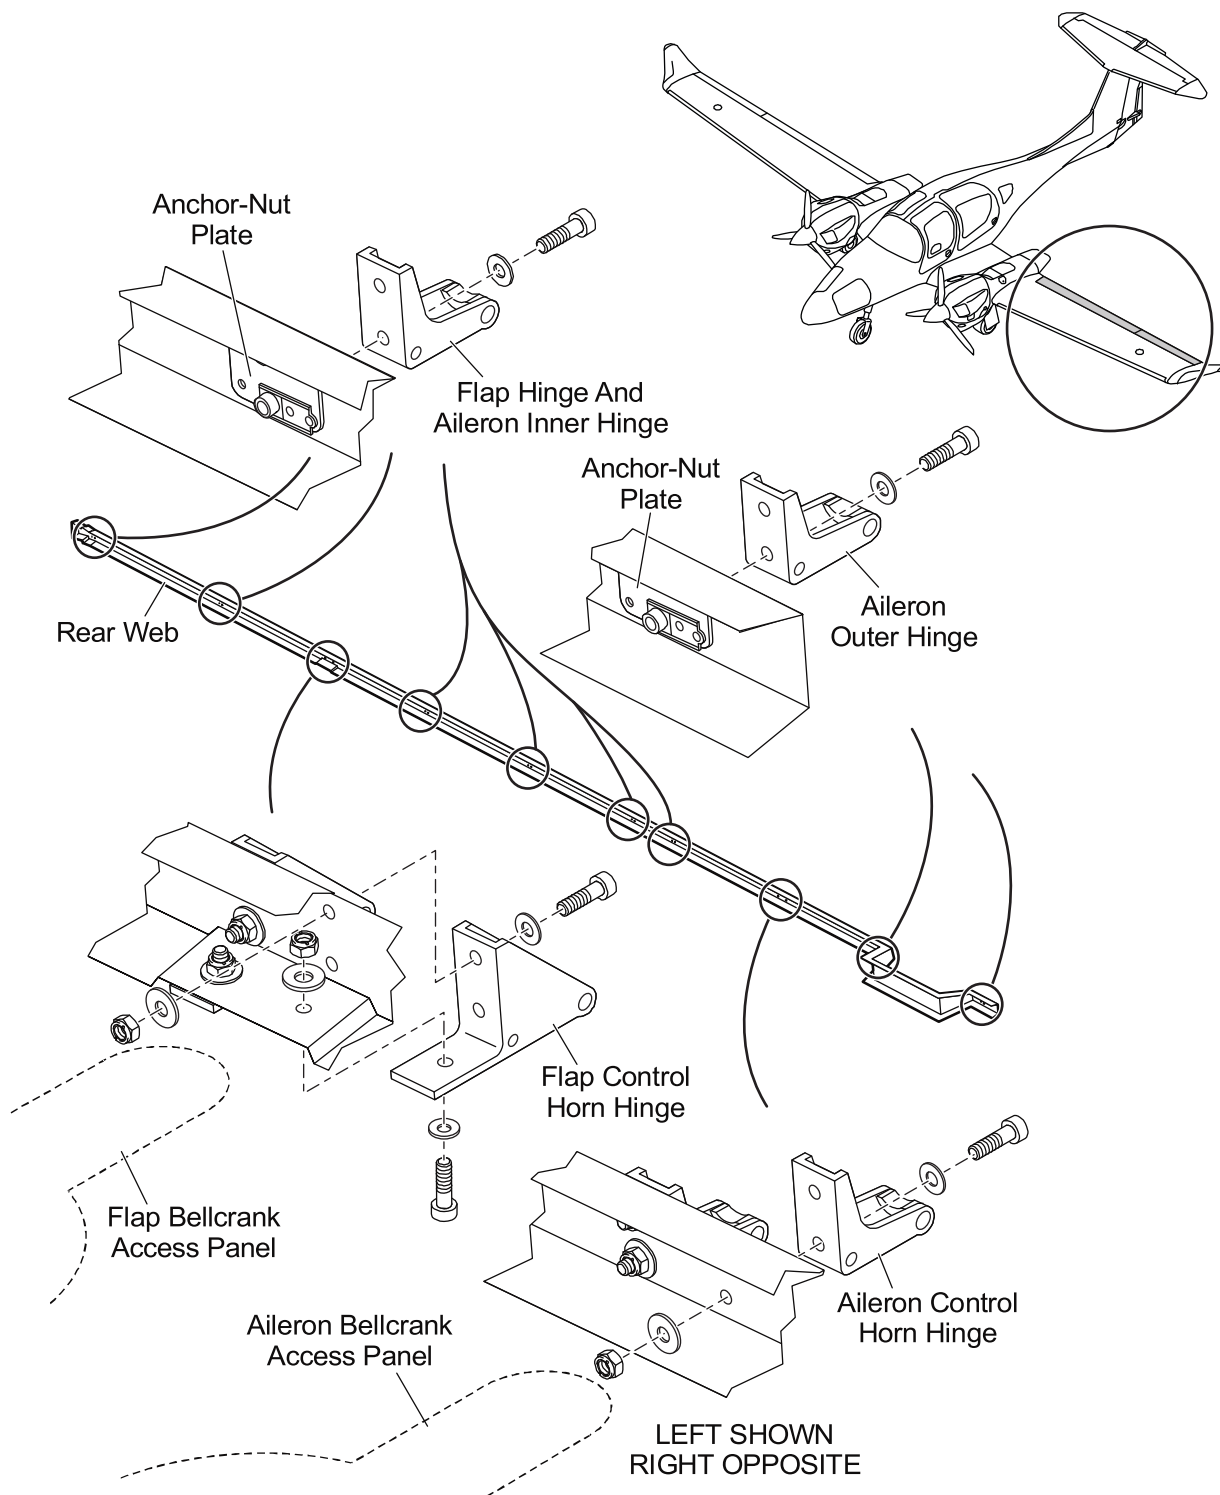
Control Surface Hinge-Bracket - Removal/Installation
